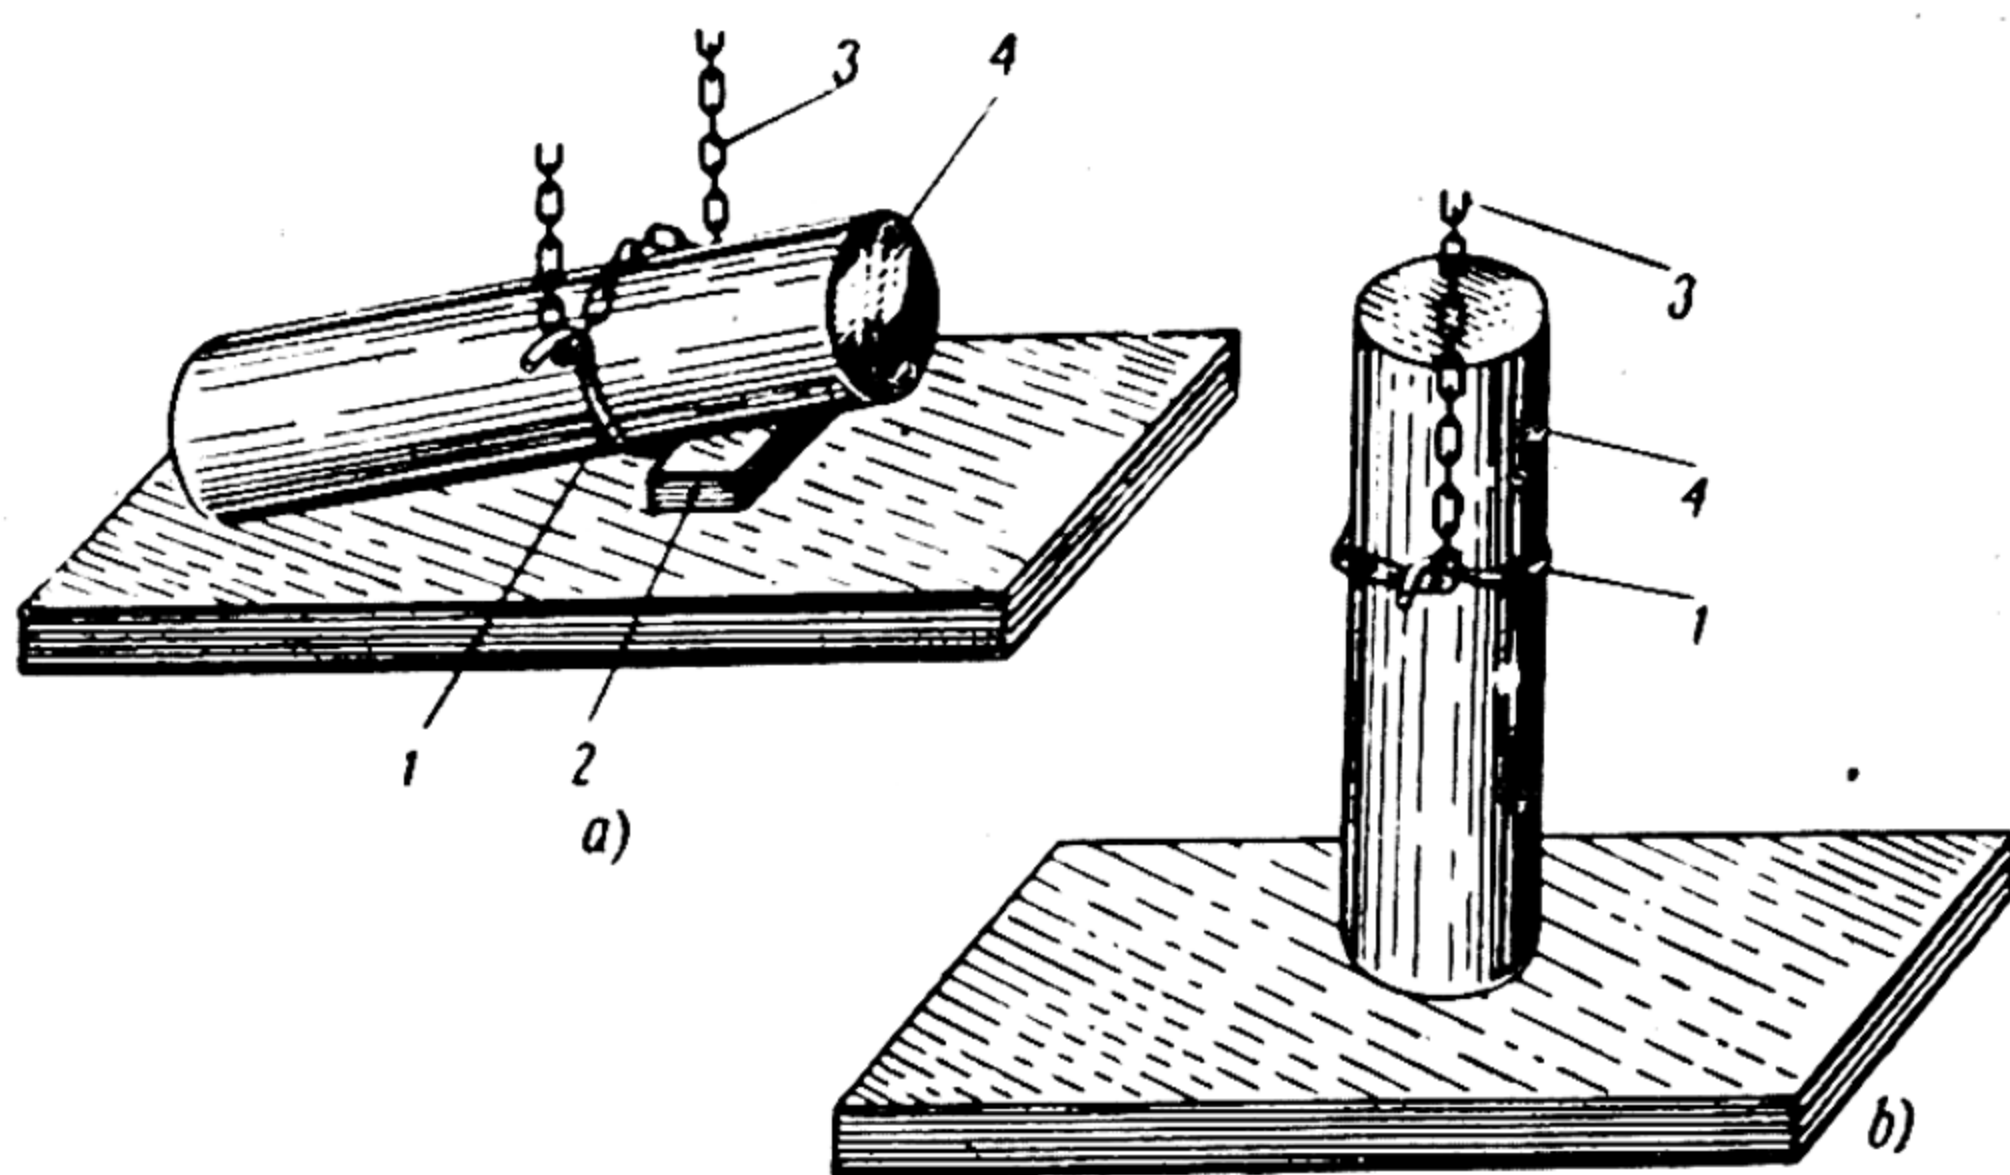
Scheme of installing billeted (reduced) ingot in vertical position, using shackle and crane:
